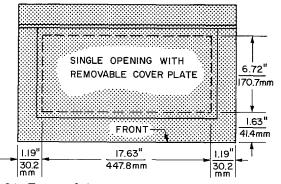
Top conduit entrance space 13-in. (330 mm) deep section
